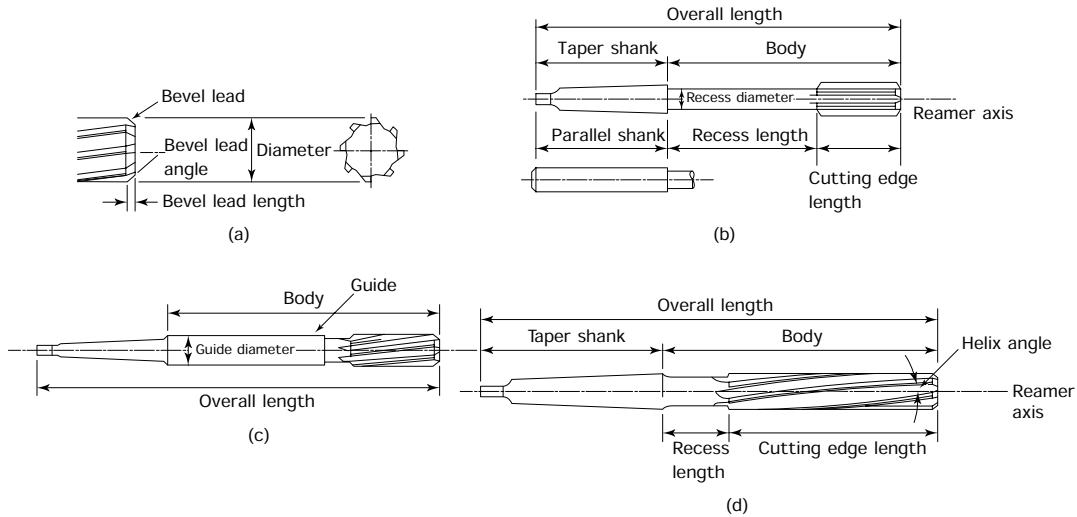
Types of machine reamer: (a) entering end of parallel machine reamer (long fluted machine reamer); (b) machine (chucking) reamer with Morse taper or parallel shank; (c) machine jig reamer; (d) long fluted machine reamer with Morse taper shank, right-hand cutting with left-hand helical flutes
